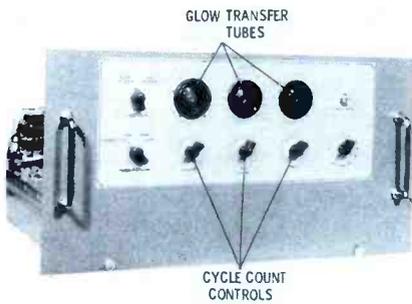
Exact forge control is provided by this simple weld-current computer.
